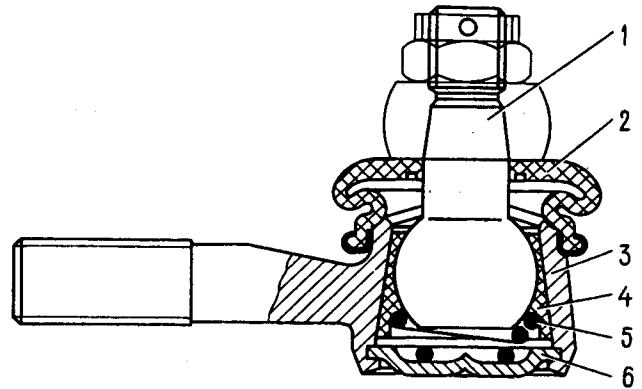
Steering Rod Ball Joint, Sectionalized:
